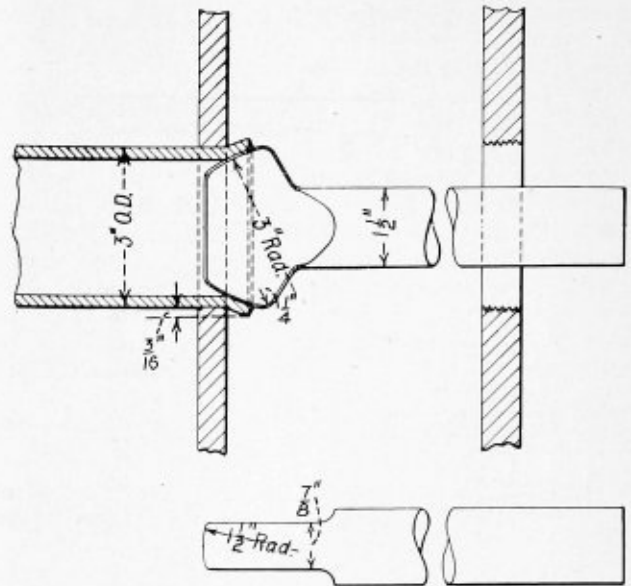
Bell out the tube to an amount equal to approximately the thickness of the tube using tool with contour shown
